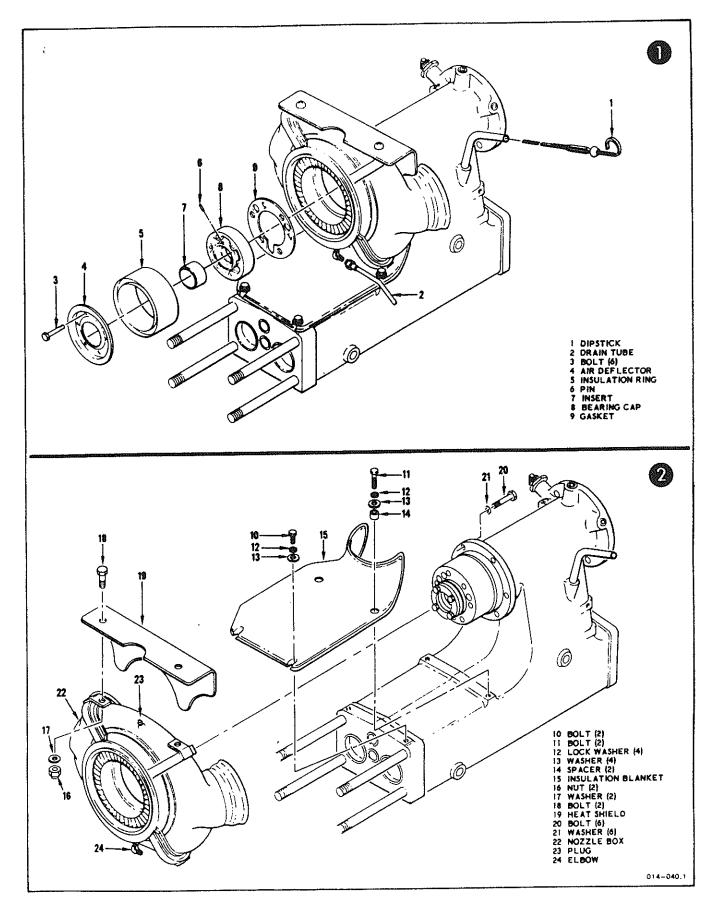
Rotor Housing and Sump, Exploded View (Sheet 1 of 2)
